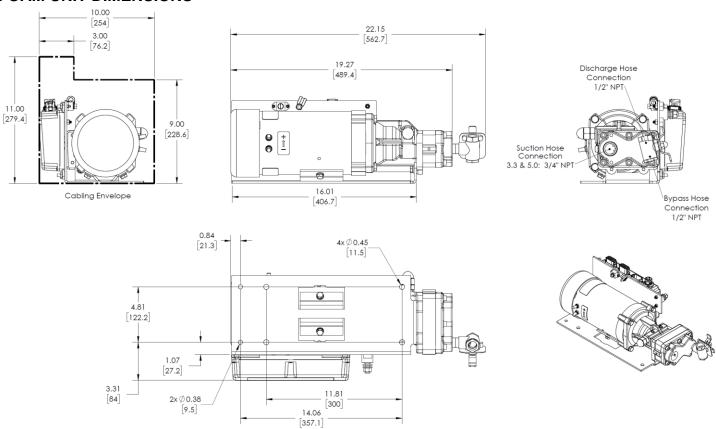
Installation Envelope Dimensions for 3.3 and 5.0 Foam Pumps
